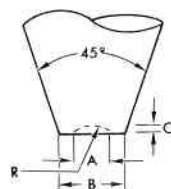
Explosive Rivet — Heat Detonator Tool (Sheet 1 of 2)
